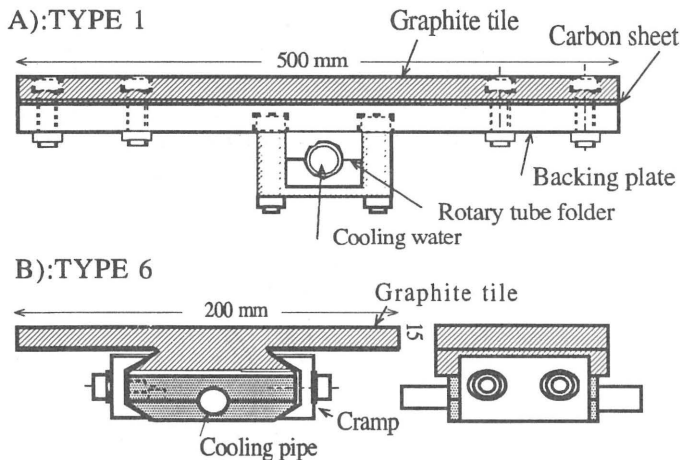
Cross-sectional views of real size mechanically-joined C-Cu materials for divertor plate. A): type 1, B): type 6.
